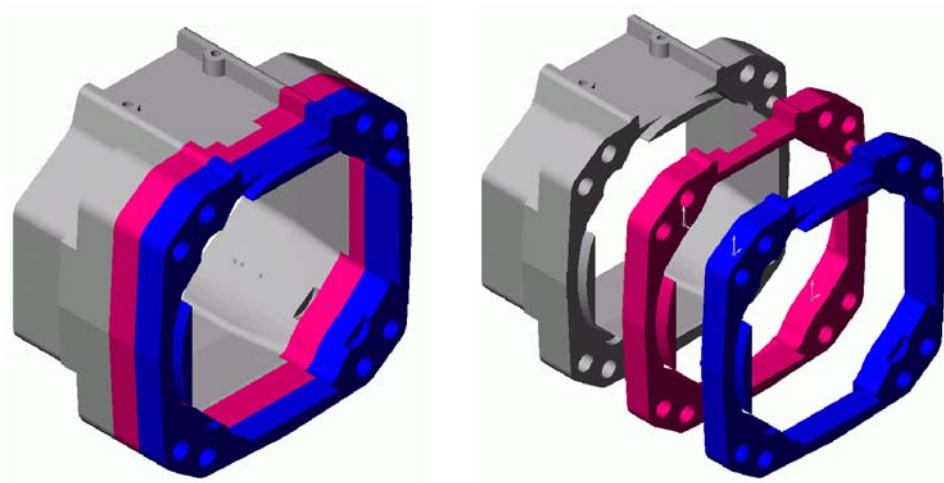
Three Pin Wrist Assembly Figure 4.12 Exploded Three Pin Wrist Assembly
